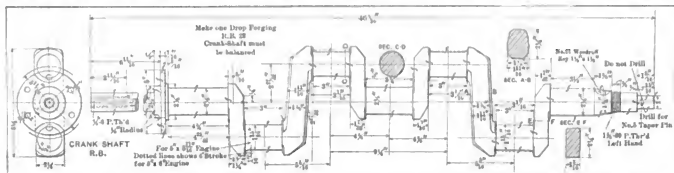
National crankshaft, made of best crankshaft steel, with stout throws and perfectly balanced for high speed
